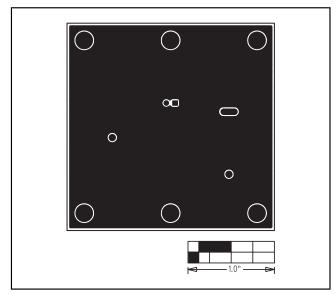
MAX9586 EV Kit PCB Layout—Solder Side
